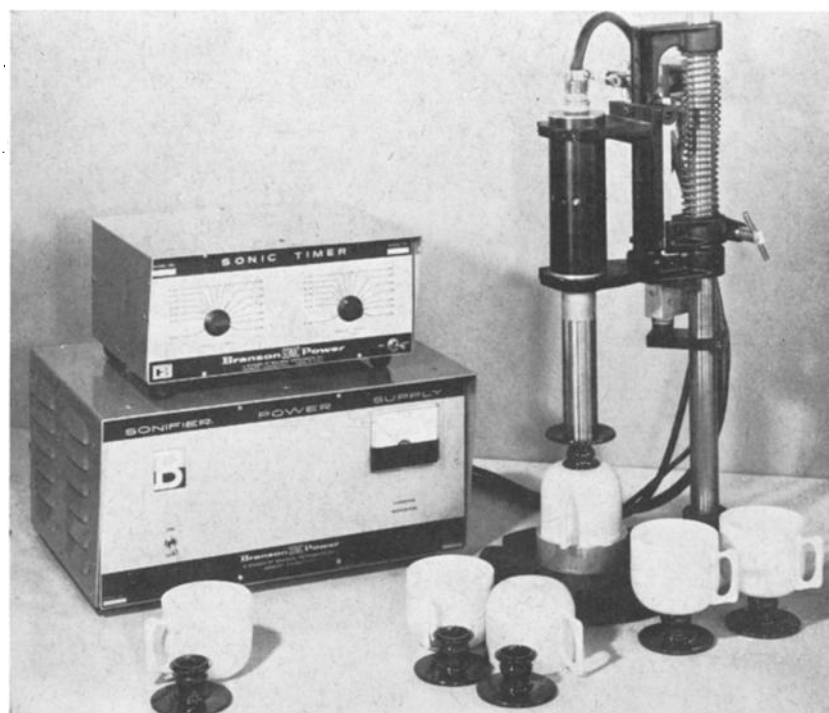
Branson farfield welding process, Patent No. 3,224,916.
